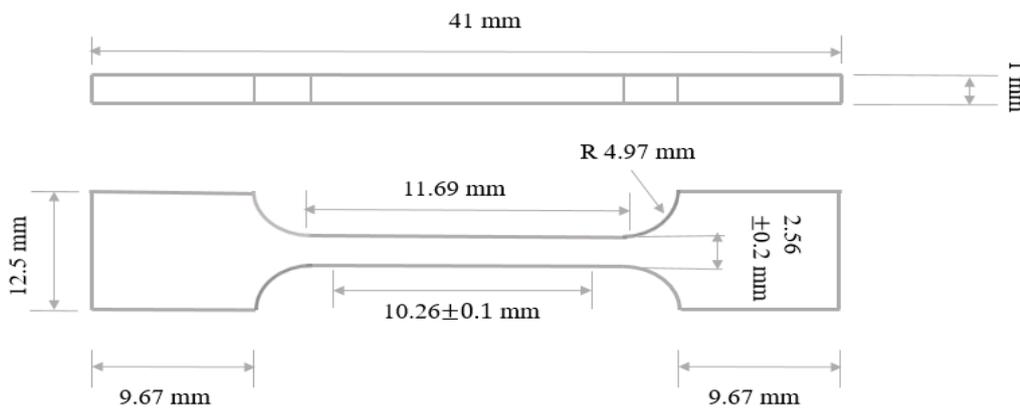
Dog-bone like specimen machined using EDM for tensile test.
